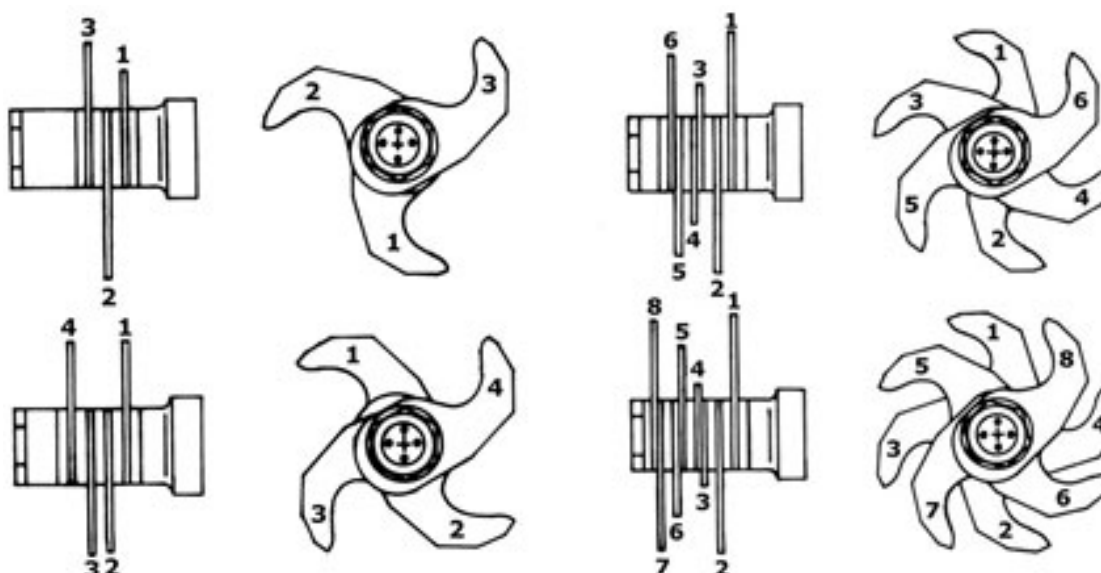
Different bowl cutter knife settings, with typical cutting sequences
